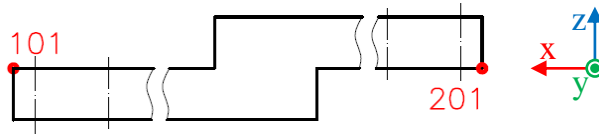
Reference points of specimen B, single piece of steel in the shape of two assembled specimens A
